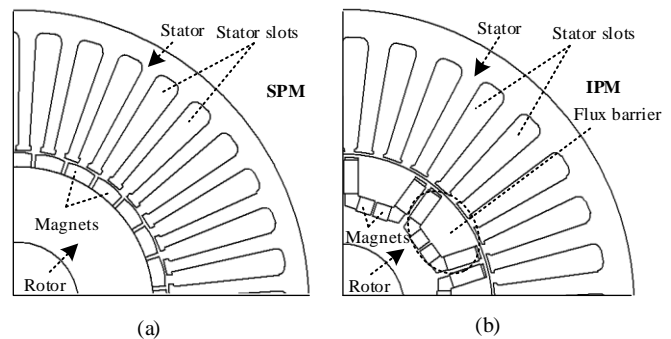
Main geometry of designed motors; (a) SPM, (b) IPM
